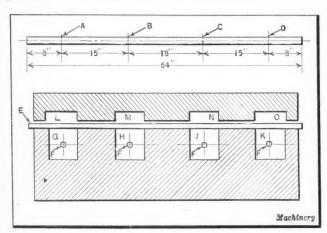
Cross-section of Heating Furnace for Piece shown at A, Fig. 5
